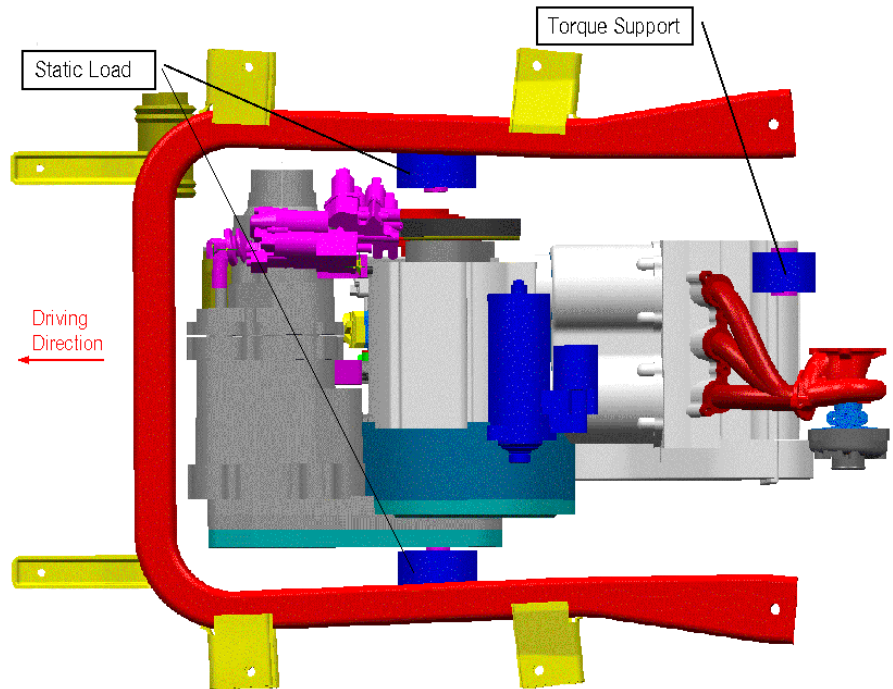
Three-point engine mount concept bottom view
